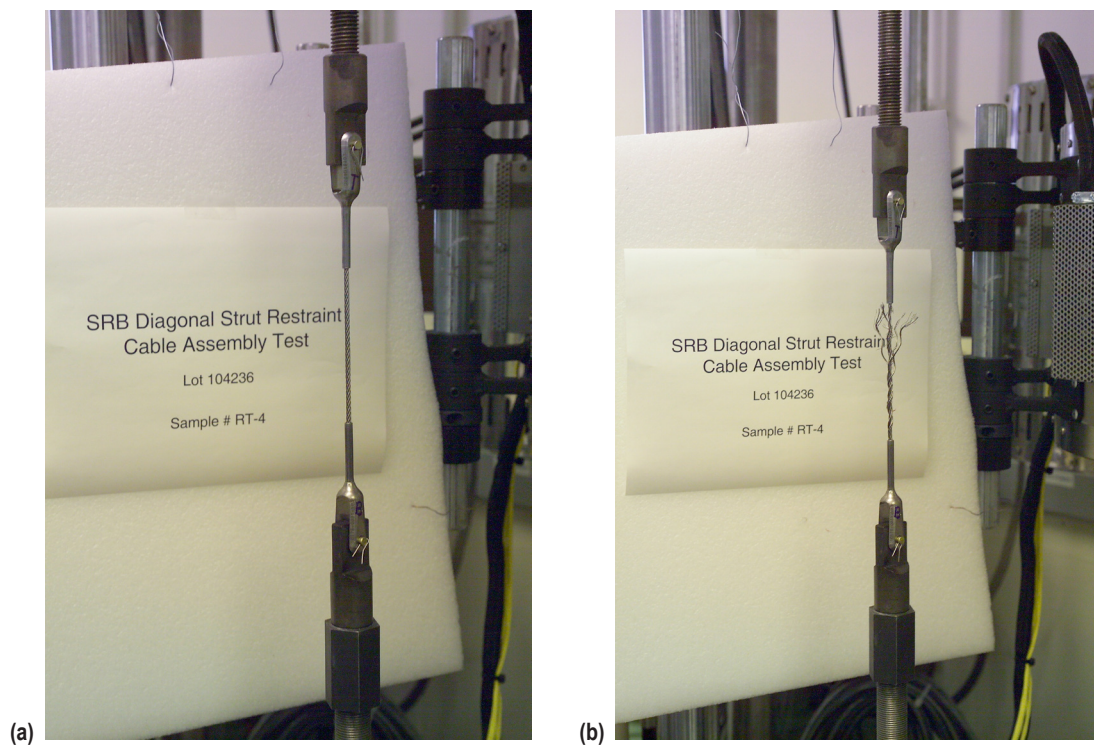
104236–RT–4 (a) before testing and (b) after testing.
